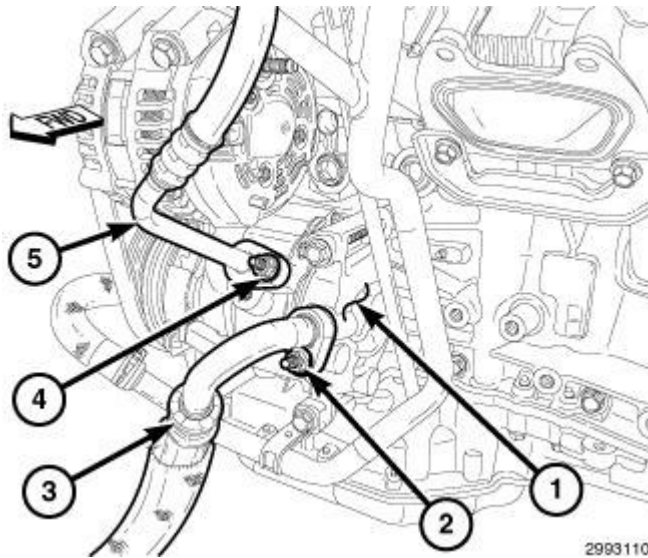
Nuts, A/C Suction Line, A/C Discharge Line & A/C Compressor
